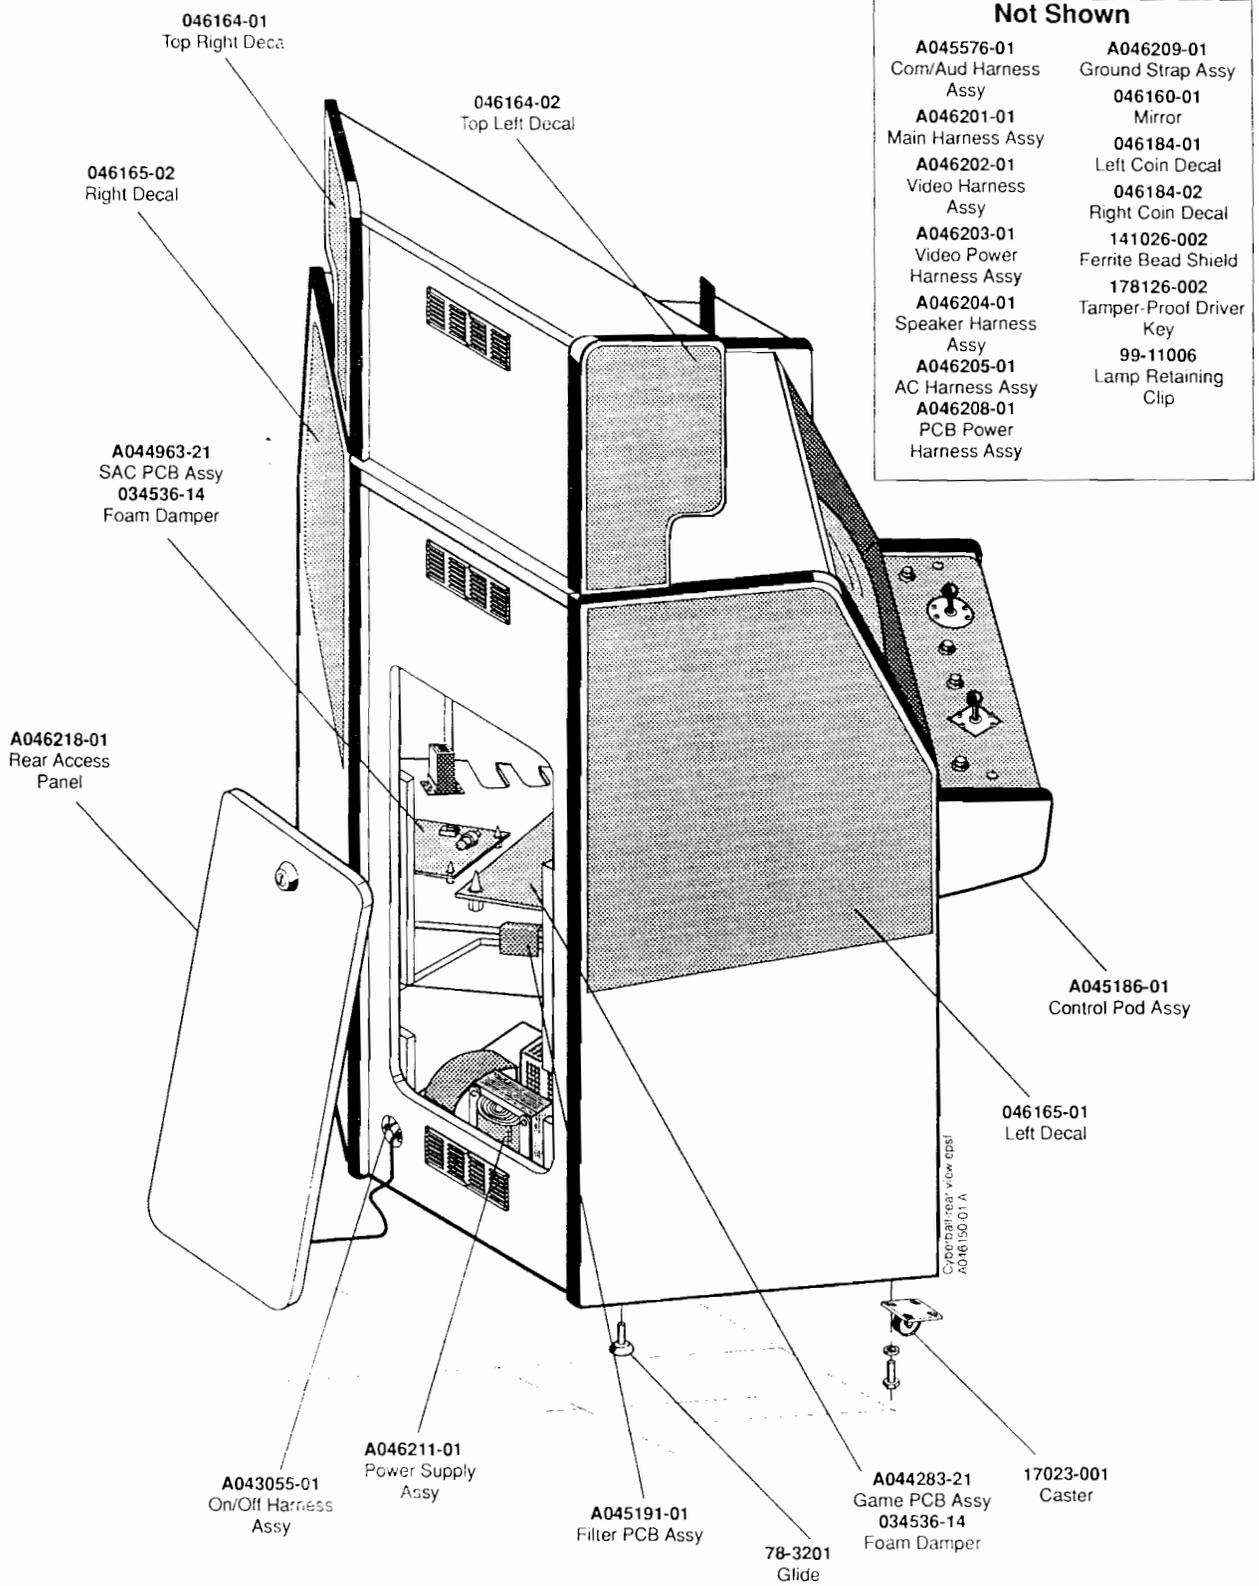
Cabinet-Mounted Assemblies, Front View
